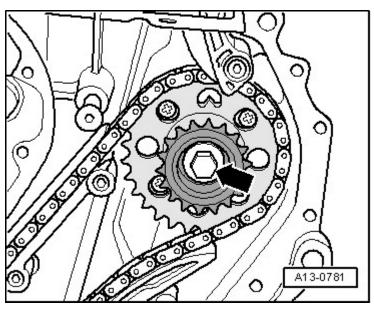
Chain Sprocket Bolt Courtesy of AUDI OF AMERICA, LLC
